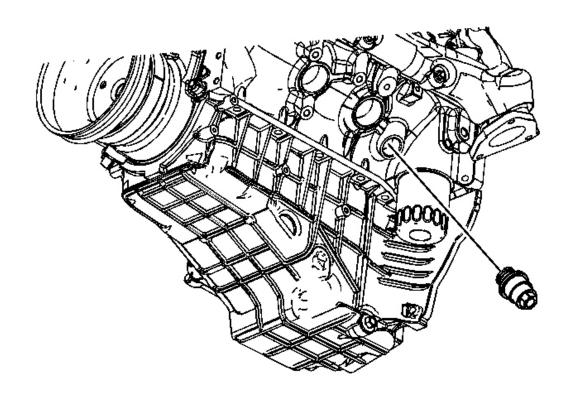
View Of Engine Oil Pressure Gage Sensor Courtesy of GENERAL MOTORS CORP.
